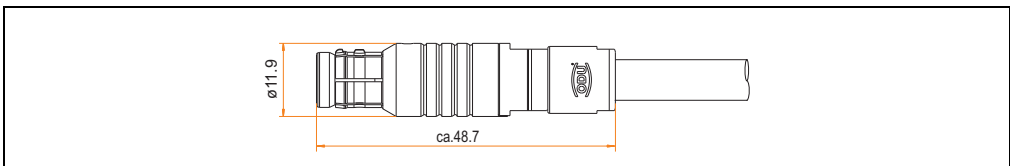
Plug dimensions (ODU Minisnap) - voltage supply cable 5CAPWR.0xxx-20
